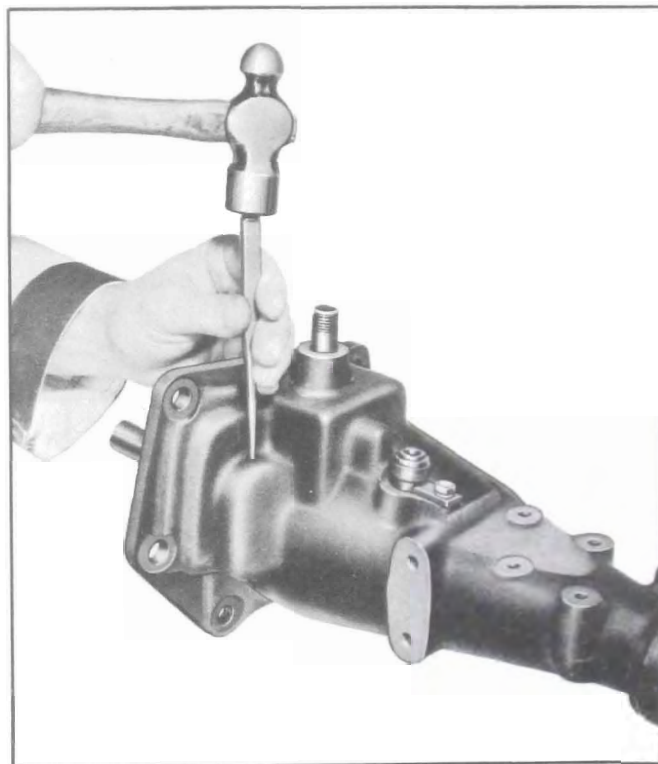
Removing Reverse Idler Shaft Lock Pin
